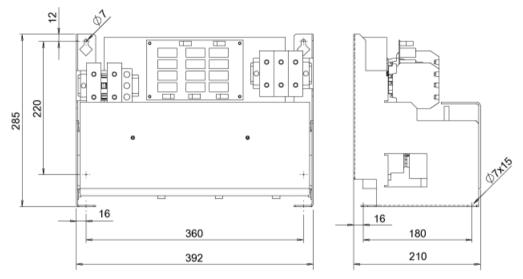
Dimension drawing of the voltage peak limiter, type 2
